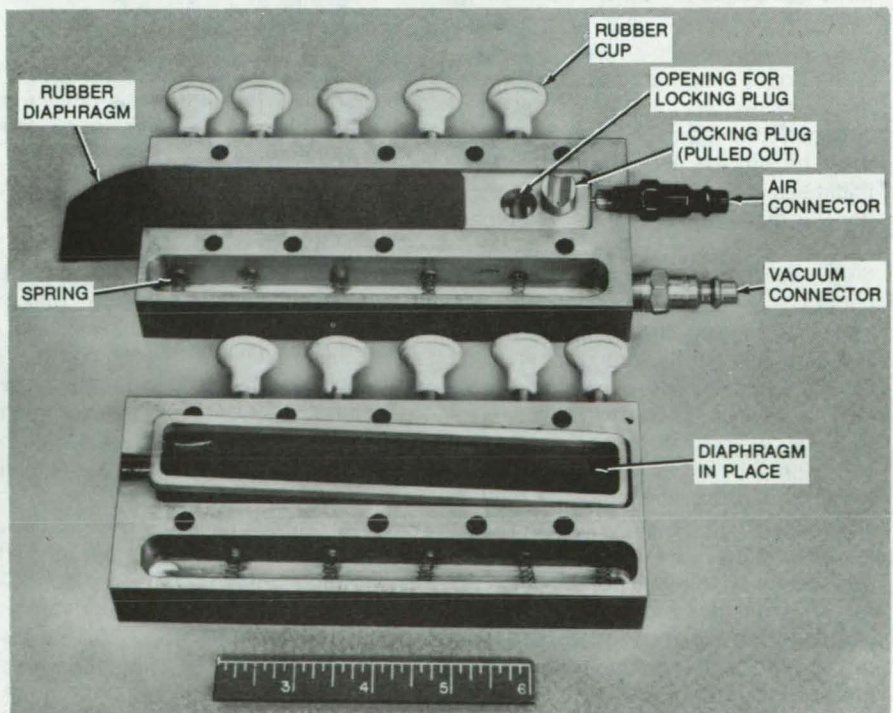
Partially Disassembled view of the fixture shows the springs that allow the spindles to adapt to parts contours and shows the diaphragm and locking plug of the air-pressure-operated arrangement for locking the spindles in place.
